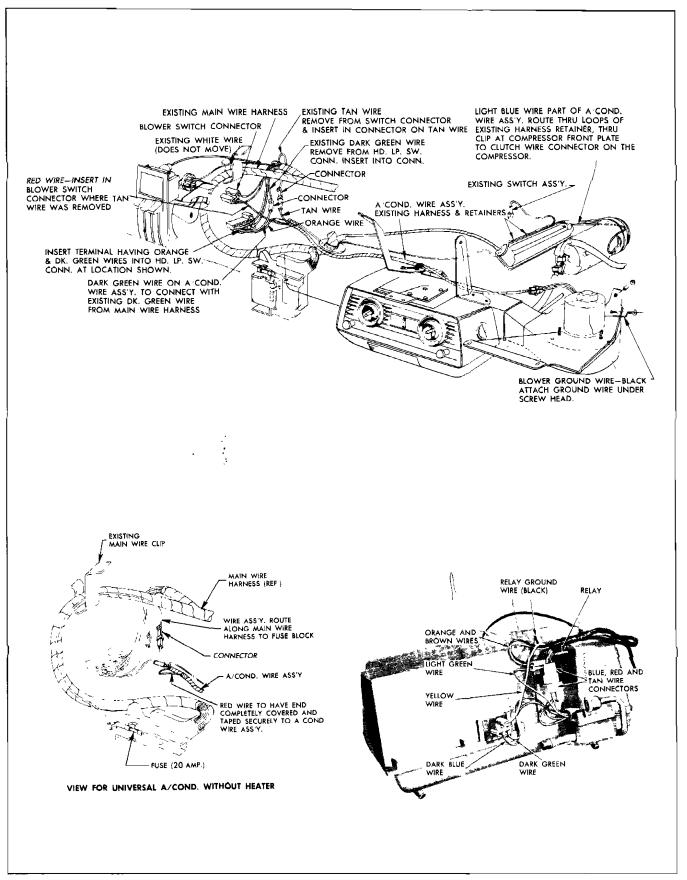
Reference Illustration—Tempest Cool Pack Electrical Parts
